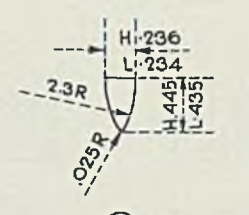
A—Dimensions of aluminum core or tip. This may also be of paper
